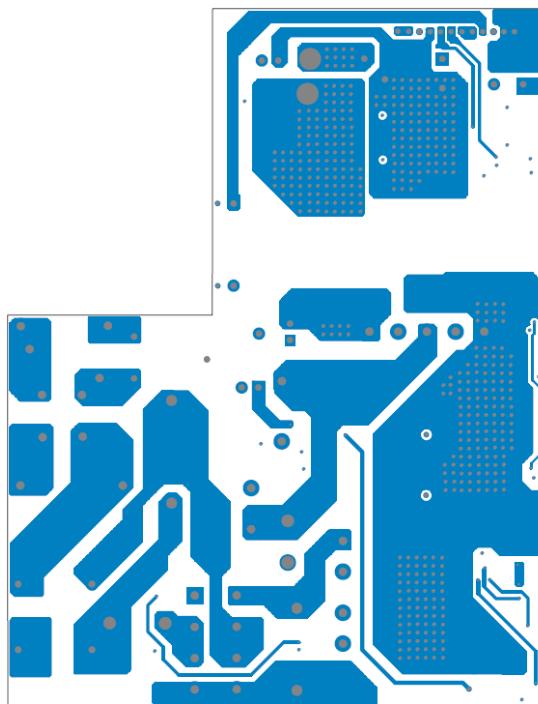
Main Board Printed Circuit Layout, Inner 2
